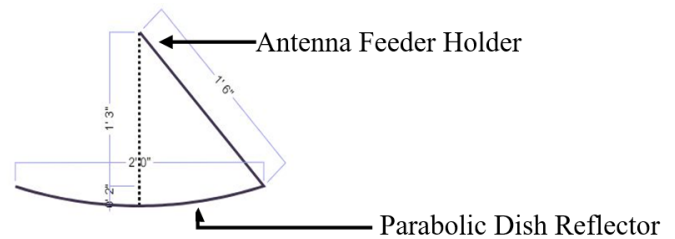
Feeding element design for the parabolic dish reflector (CAD Drawing — Free Online CAD Drawing, n.d.)
